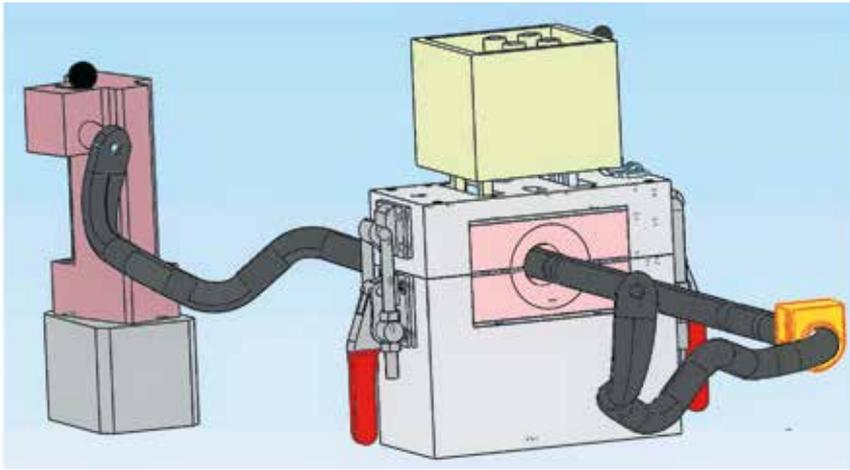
Device for the vulcanization of flexible bearings (adhesive mounting, Figs. 3 and 4)
